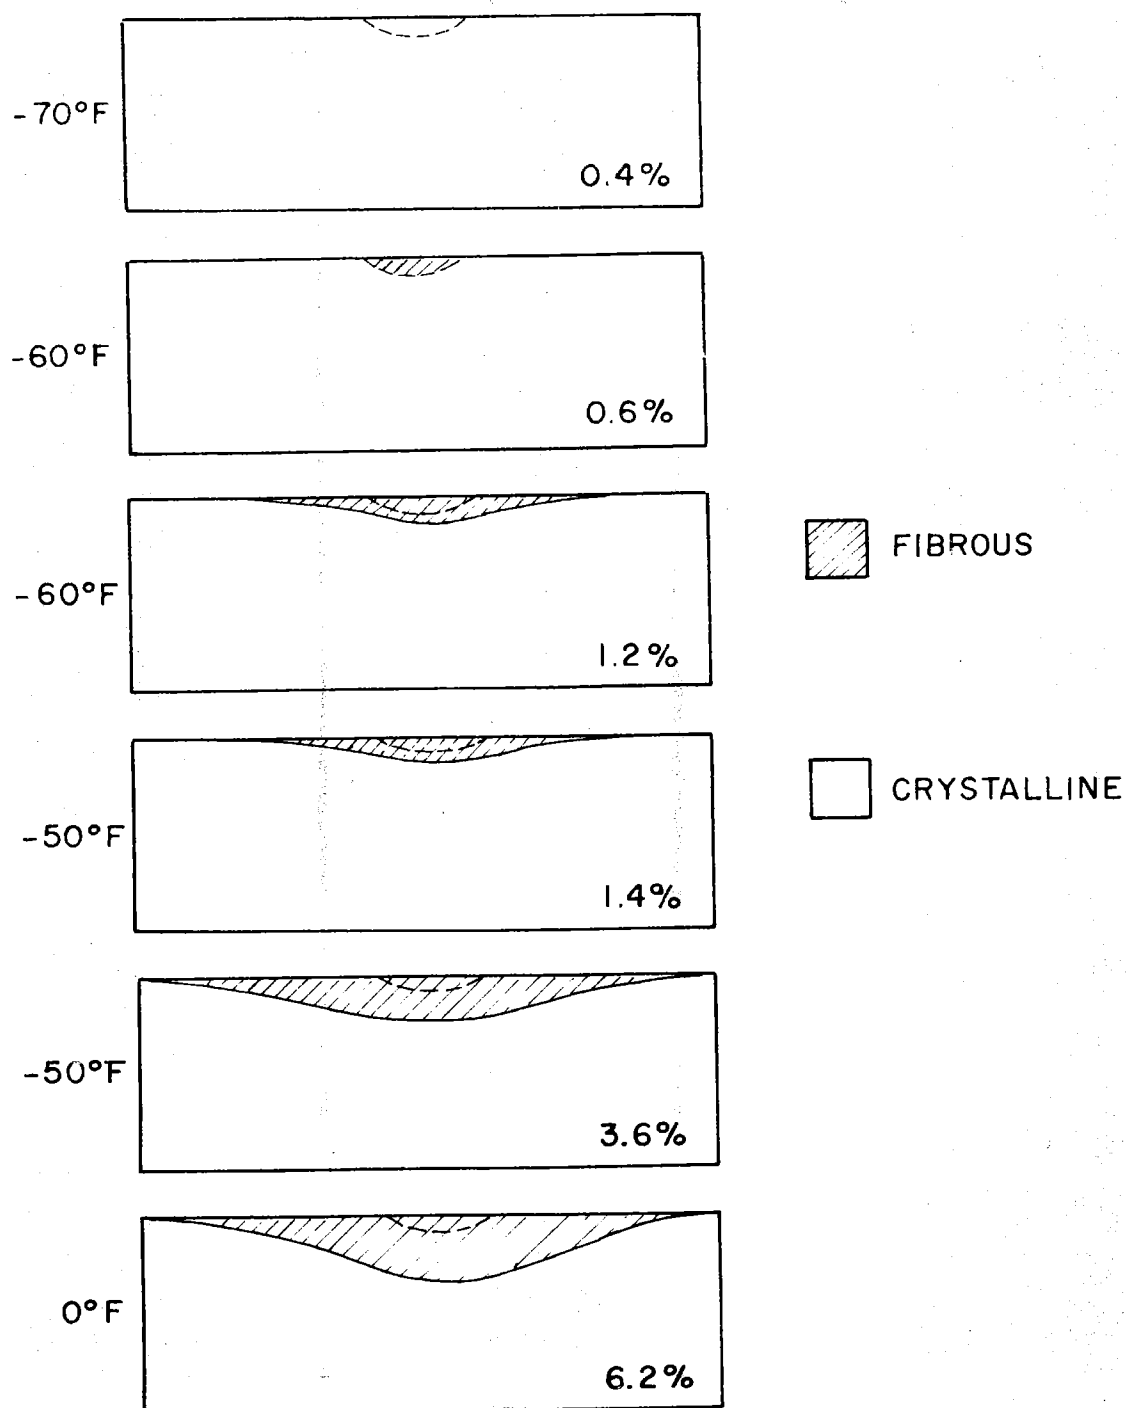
Fracture Behavior of Kinsel Specimens of A-201 Steel Welded with E6010 Electrodes and Postheated.
